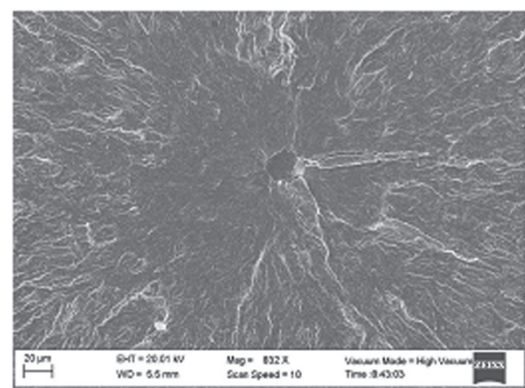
Example of subsurface fatigue crack initiation on 20 µm large inclusion
